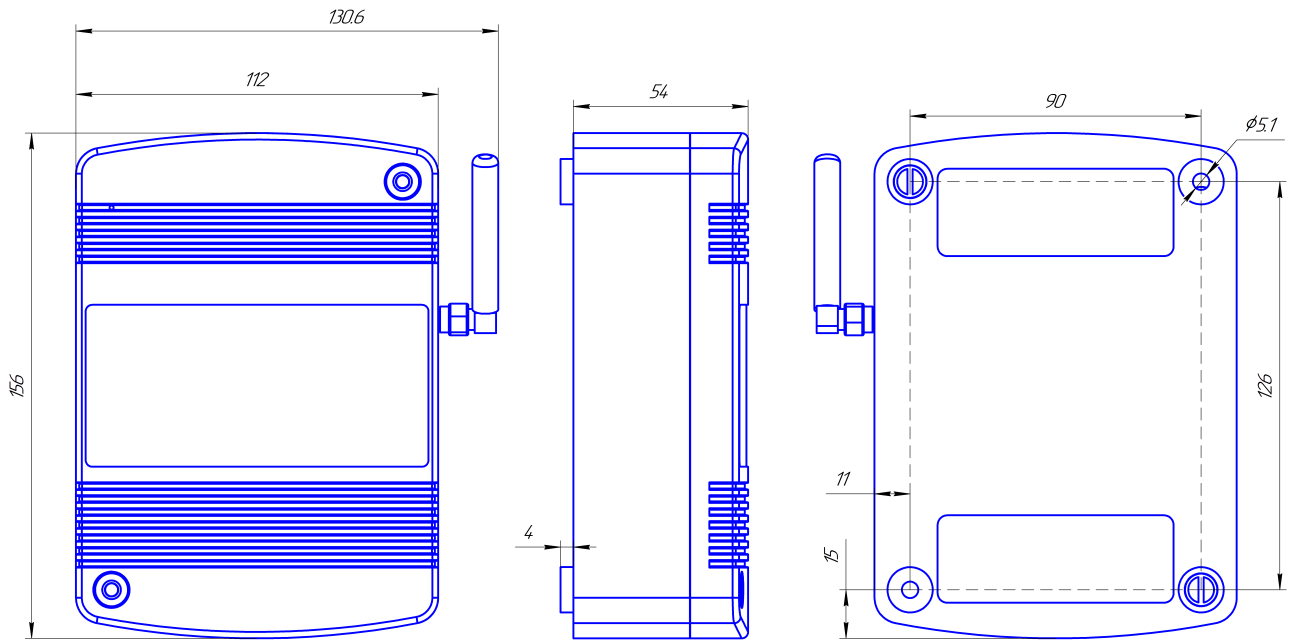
Overall and mounting dimensions of the controller with wall-mounted enclosure
